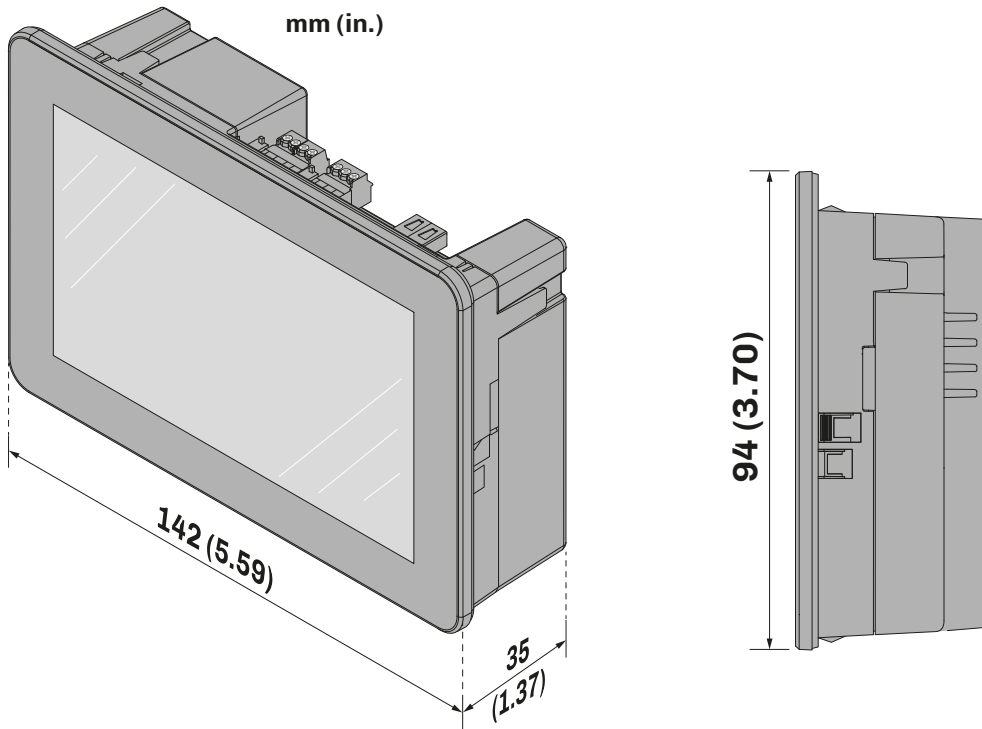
Front-mounting Vcolor 229-249 M user interface dimensions
